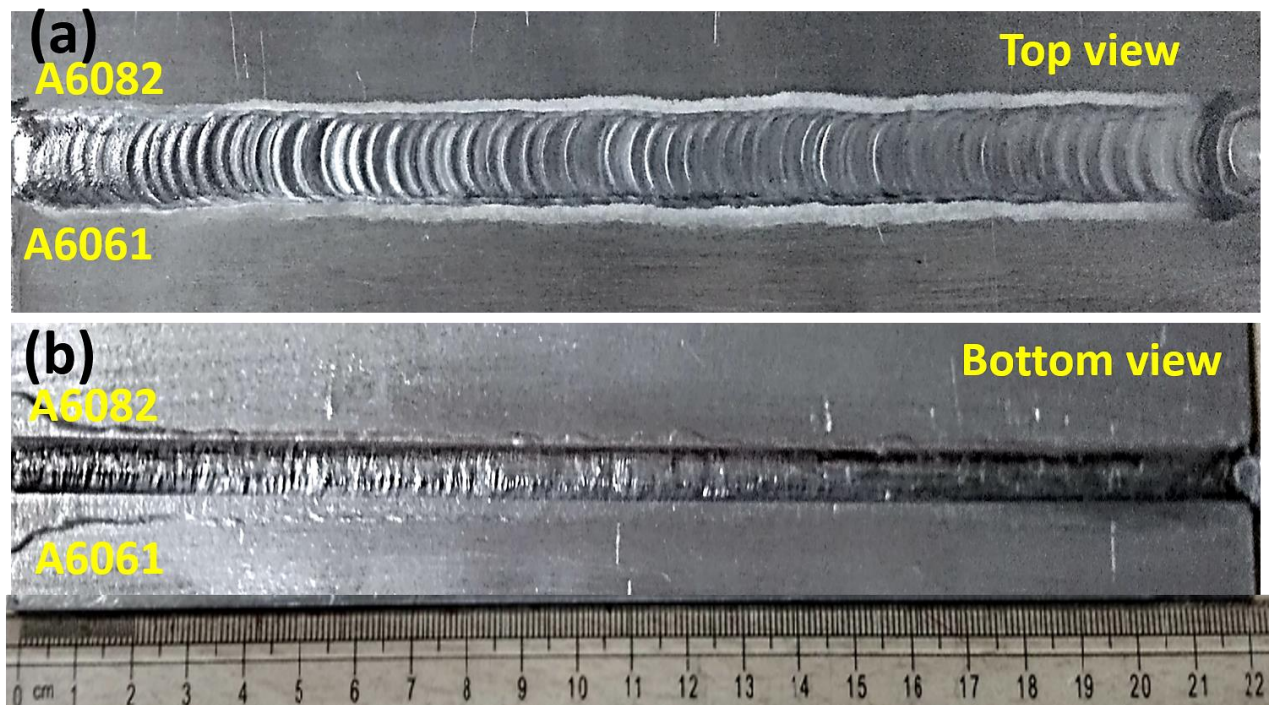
Surface appearance of the TIG welded A6061-T6 and A6082-T6 joint using ER4043: (a) Top view and (b) Bottom view
